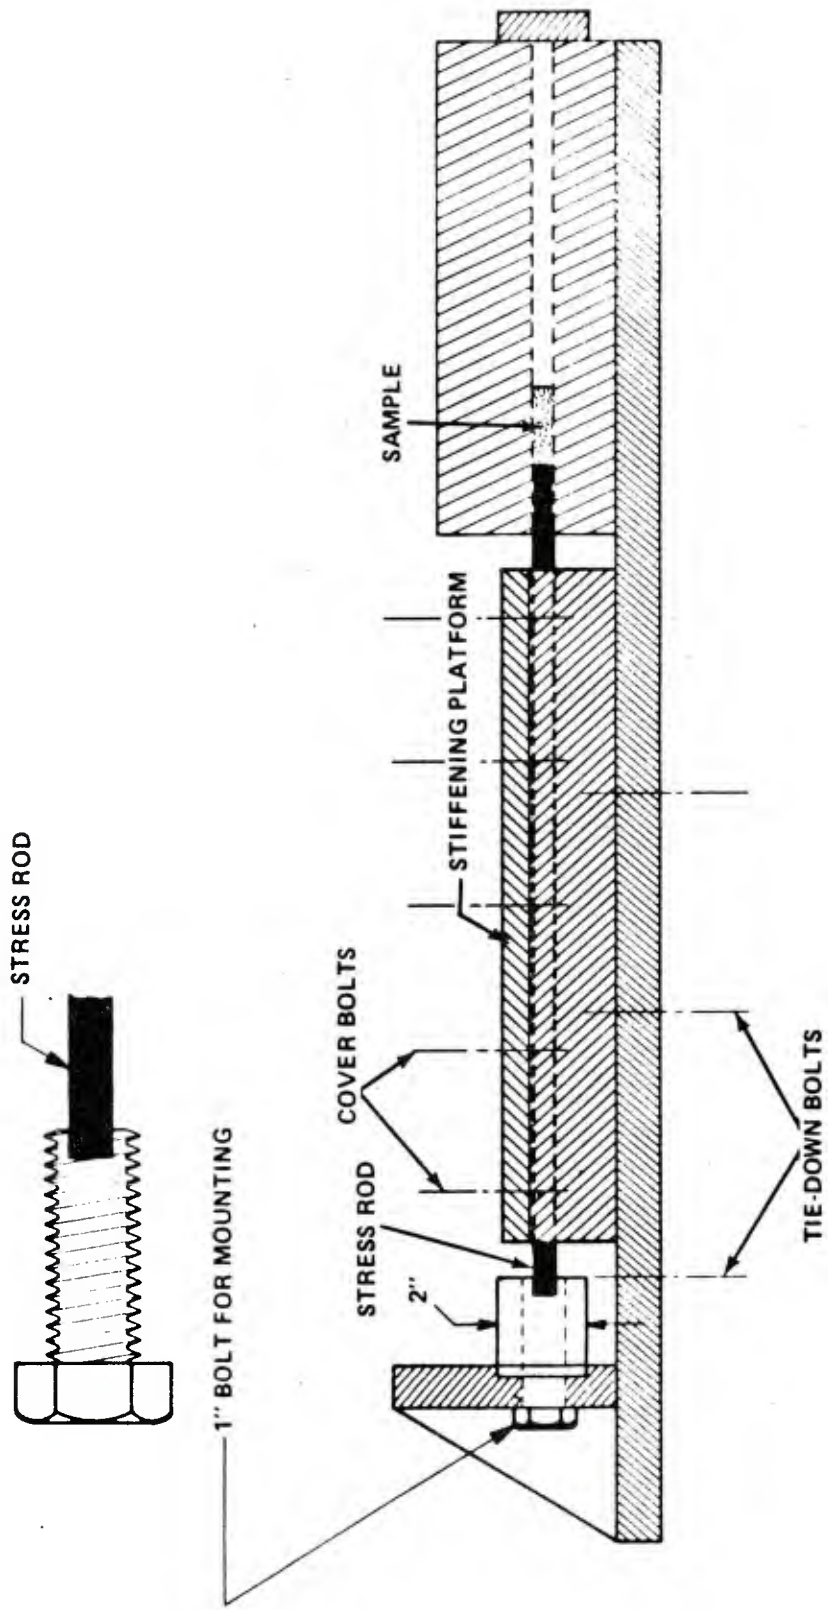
VHB Test Fixture Schematic Showing Stress Rod Mount
